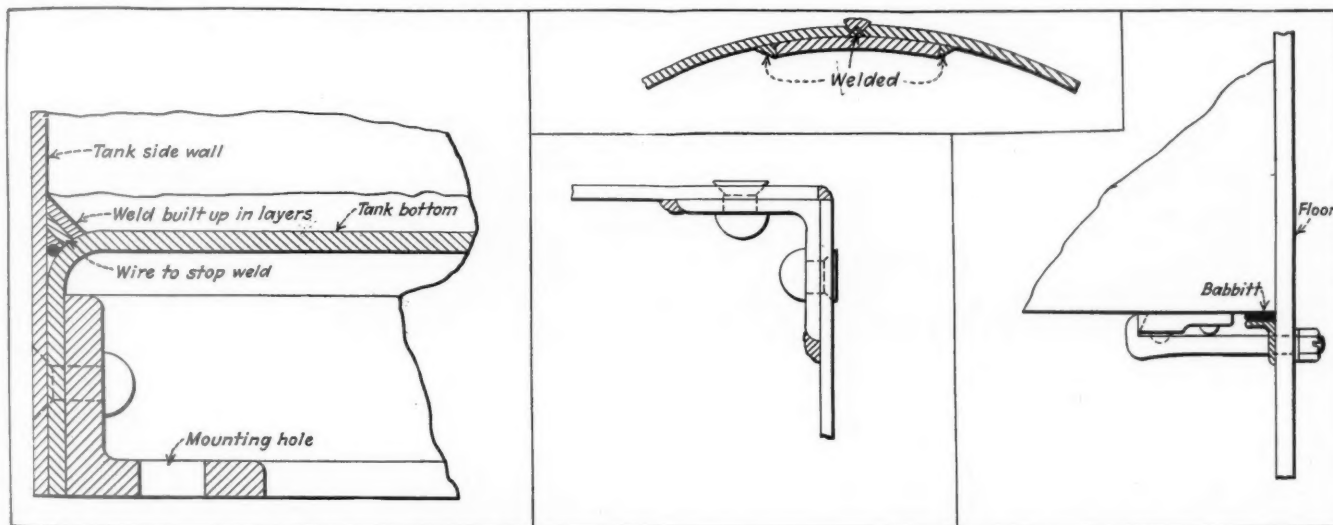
Top center—Section of triple welded vertical seam of transformer tank—Left—Method of riveting and welding bottom of transformer tank to the sides—Bottom center—Inside corners of liquid rheostat are reinforced by angles riveted and triple welded—Right—Method of fastening the liquid rheostat tank to the floor of the motive power unit
